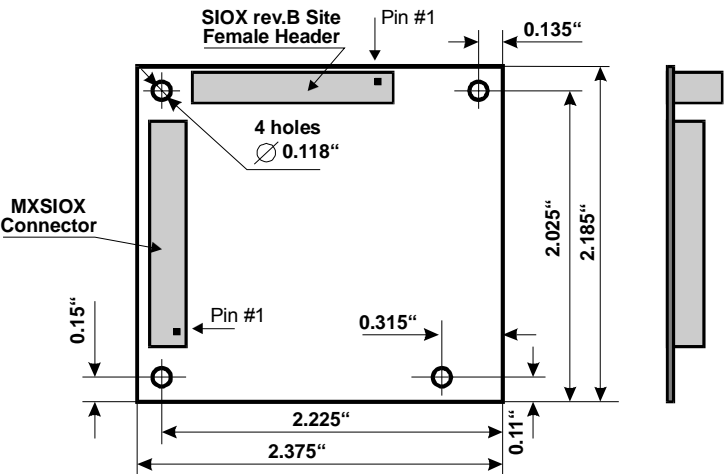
Physical dimensions of *T/SU-X1 SIOX rev.B* mini-extender.
